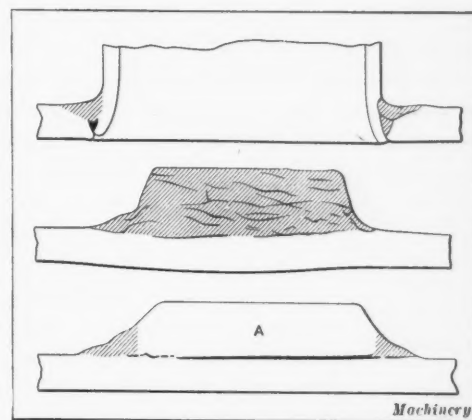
Poor Welds caused by Insufficient Preheating
